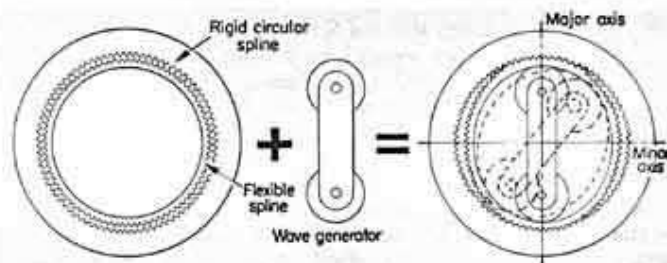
Basic 3-element rotary drive system using principle of controlled deflection. In this arrangement, which is analogous to the simple spring system of Fig. 1, rotation of wave generator produces radial deflection and tangential motion of flexible spline.
